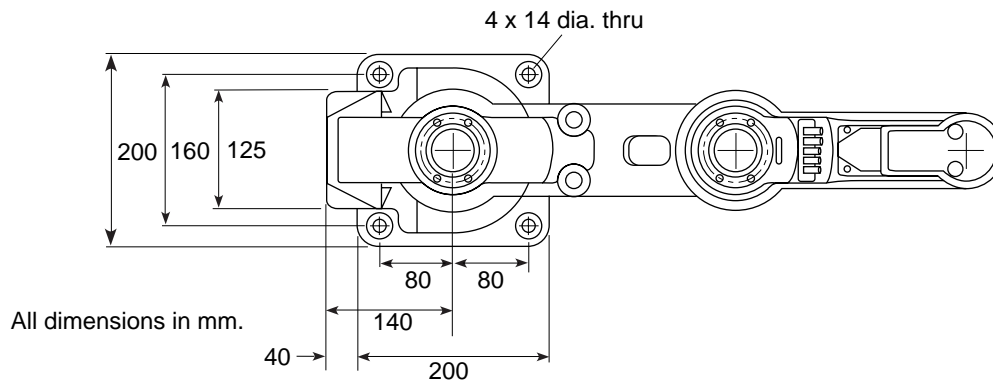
Mounting Hole Pattern (Robot-to-Mounting Surface)
